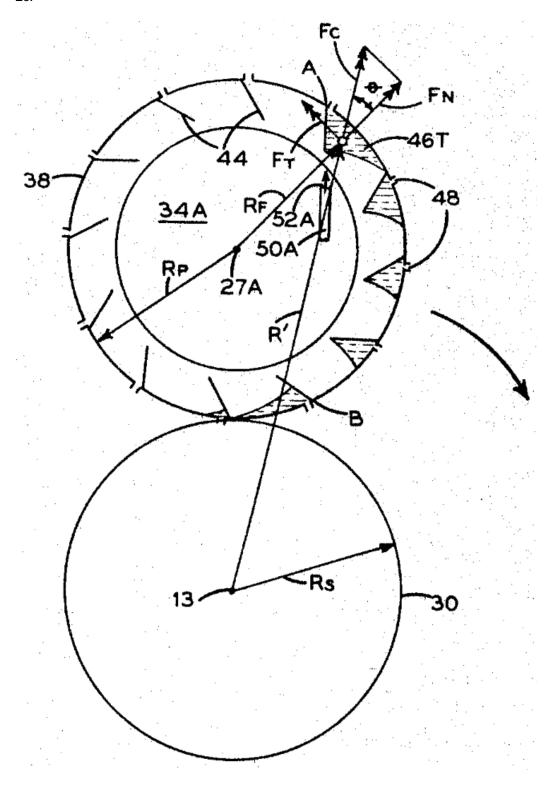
illustrates a gearing combination including an input shaft (10), a planet carrier (22), orbital gears (28A), (34A) mounted on the carrier, housing (16), sun gear (30) and output shaft (14). The orbital gears include vanes (44) on part (34A) that interact with the fluid in the housing for torque transmission.
